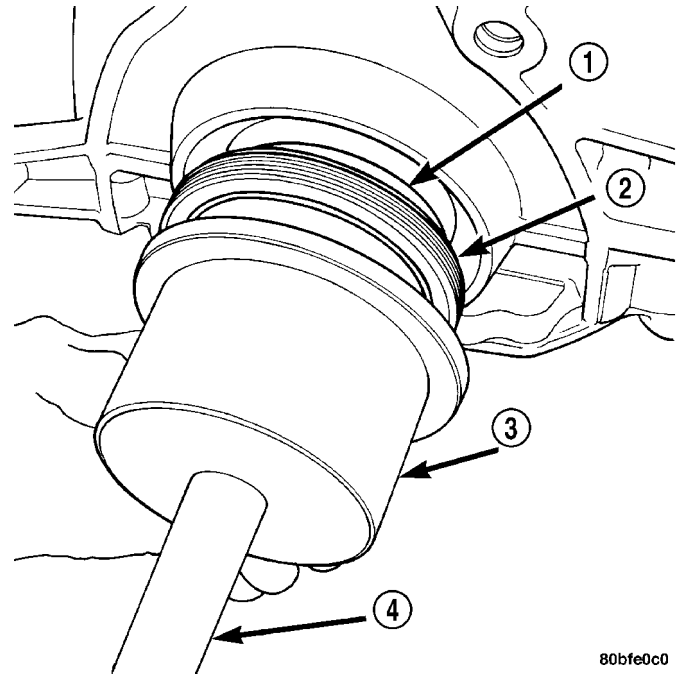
Rear Crankshaft Seal and Special Tool 6926-1
